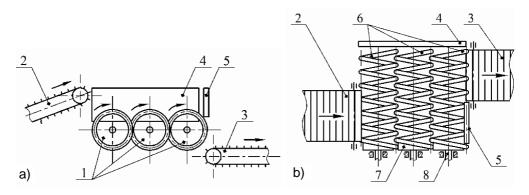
Spiral separator of potato heap lifted from soil: a - side view, b - top view; 1 - spirals; 2 - feeding conveyor; 3 - discharge conveyor; 4 - side protective apron; 5 - face protective apron; 7 - hub; 8 - drive shaft (Bulgakov et al., 2019).
